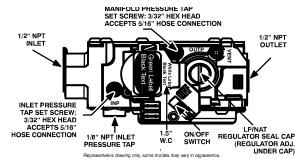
Single-Stage Gas Valve with Tower Pressure Ports  $^{\rm A170118}$
